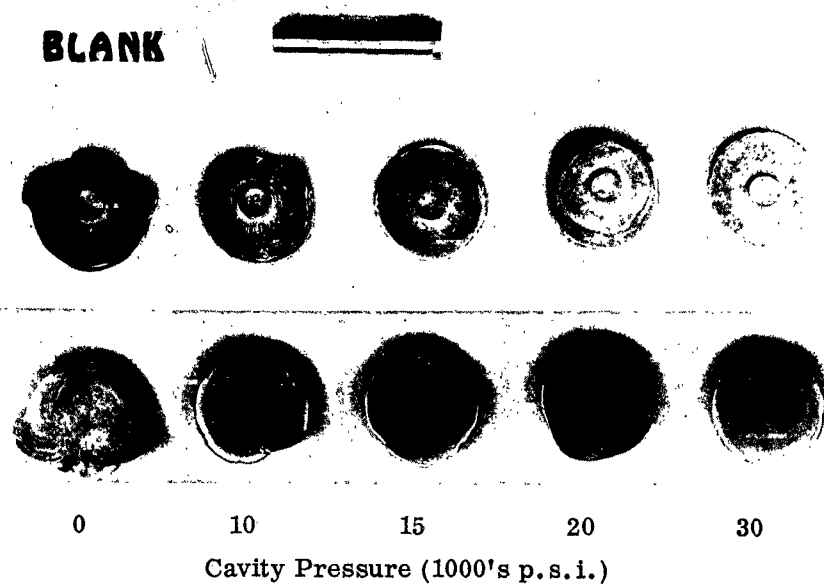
1100F aluminum billets upset into a die cavity of cerrobend starting with a straight billet.
